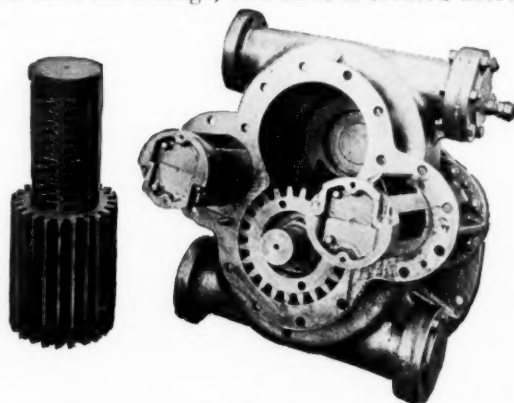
The direct driven main oil pump partly dis-assembled, showing the cages carrying the double check valves by which oil is pumped in one direction only, irrespective of the direction of engine rotation. The idler gear is shown with its spindle partly withdrawn to show the ports by which oil trapped between engaging teeth, is by-passed through holes drilled between the gear teeth. The gears are $5\frac{3}{4}$ " outside diameter, 7" long and have 21 teeth. At 400 r.p.m. it delivers 55 gallons a minute.
